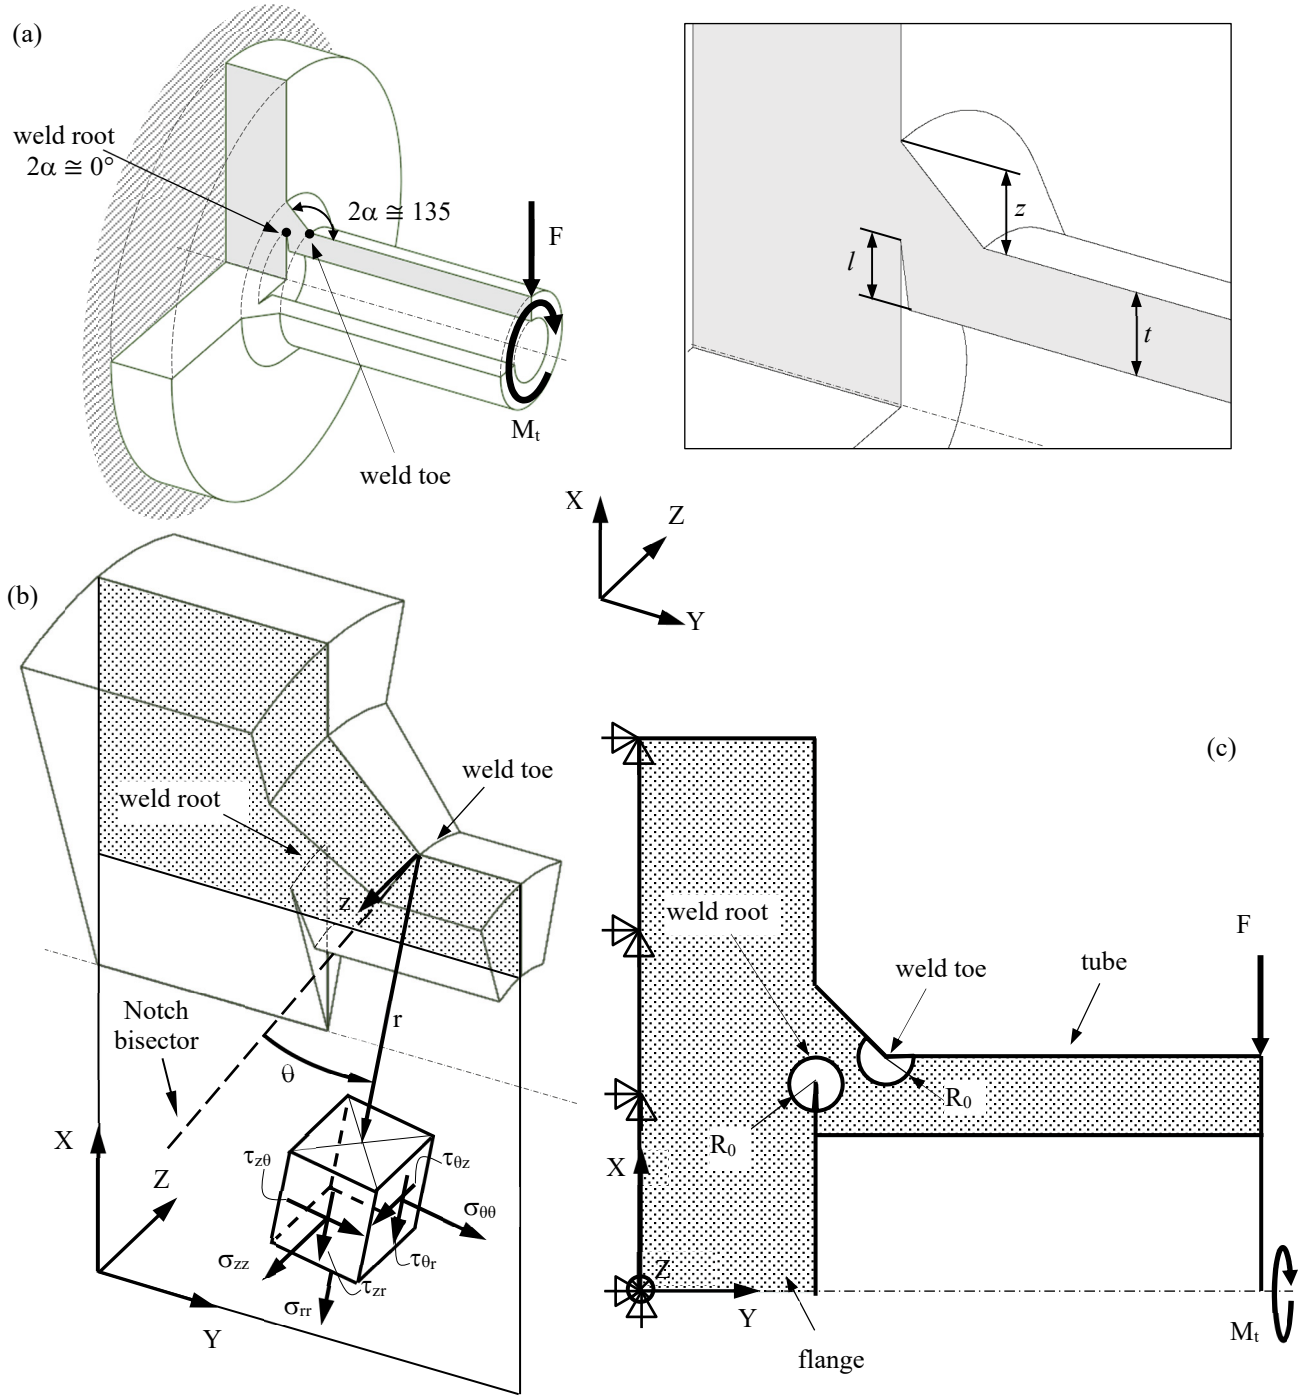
(a) Assumptions of the NSIF-based approach in fatigue design of welded joints referring to a partial-penetration tube-to-flange welded joint under combined bending and torsion fatigue loading. (b) Cylindrical reference system (r, θ, z) centred at the weld toe and local stress components. (c) The structural volume of radius R_0 centred either at the weld toe or at the weld root according to the averaged SED approach.
